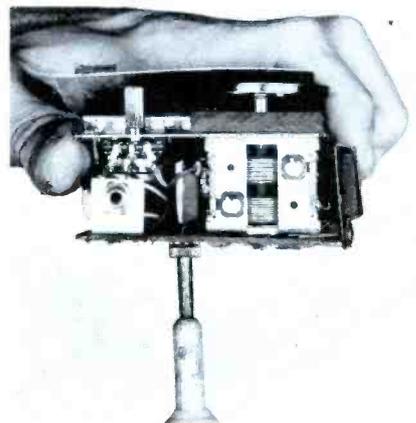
Holding wiring side down causes melted solder to accumulate on tiplet.
